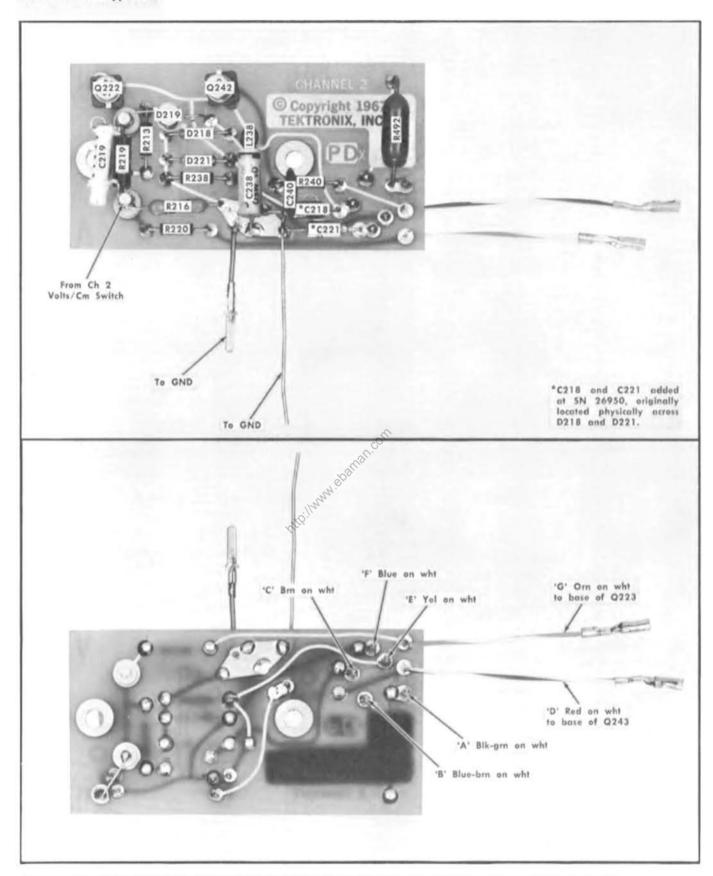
Channel 2 Input FET board. Front and back view showing parts location and lead connections.
